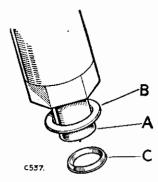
Position of injection nozzle washers A-Nozzle B-Copper washer C-Steel washer
